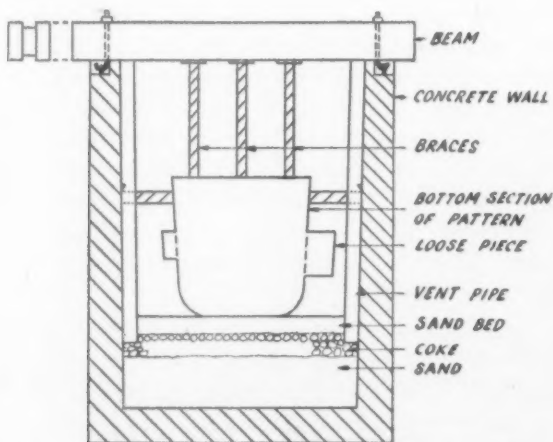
VIEW OF CASTING PIT SHOWING BRACING OF PATTERN TO PREVENT MOVEMENT DURING RAMMING.
